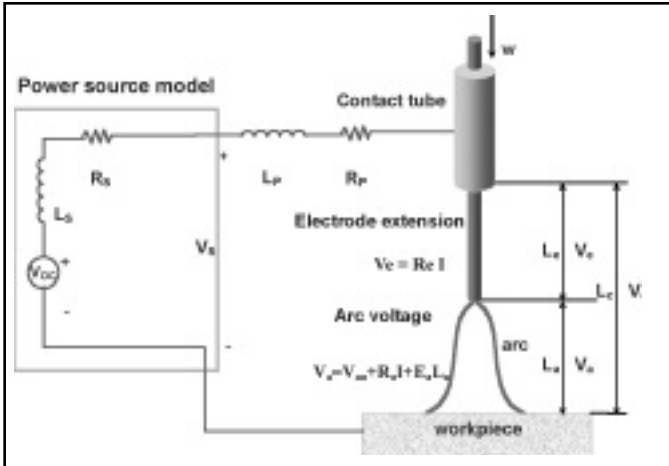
Equivalent circuit of GMA welding system using CV power source.
